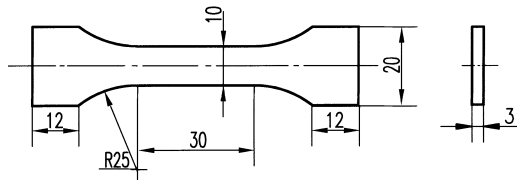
Geometry of specimen used in fatigue testing, dimensions in mm.
